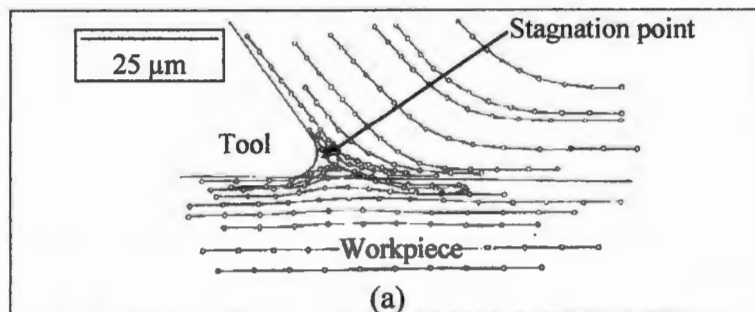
Sketch of orthogonal Cutting process with finite tool cutting edge radius.
